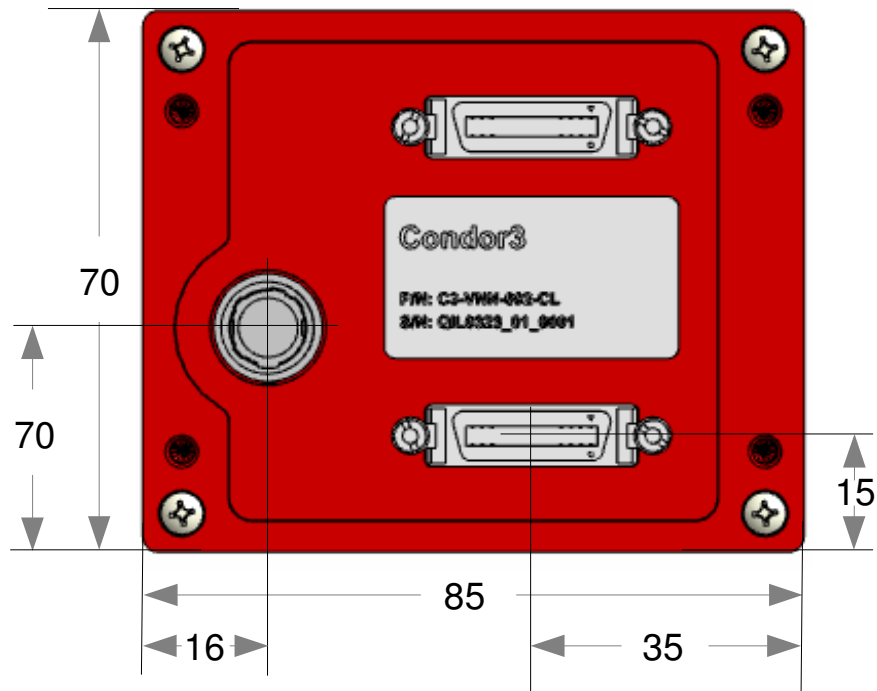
Dimensions of camera (rear view). Dimensions in mm.
